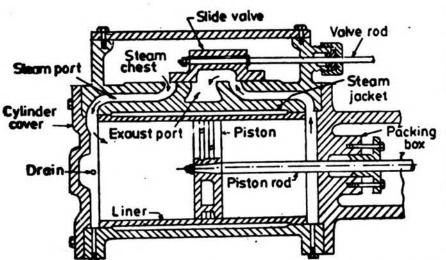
Sectional view of steam engine cylinder, piston, stuffing box, steam chest and slide valve.
